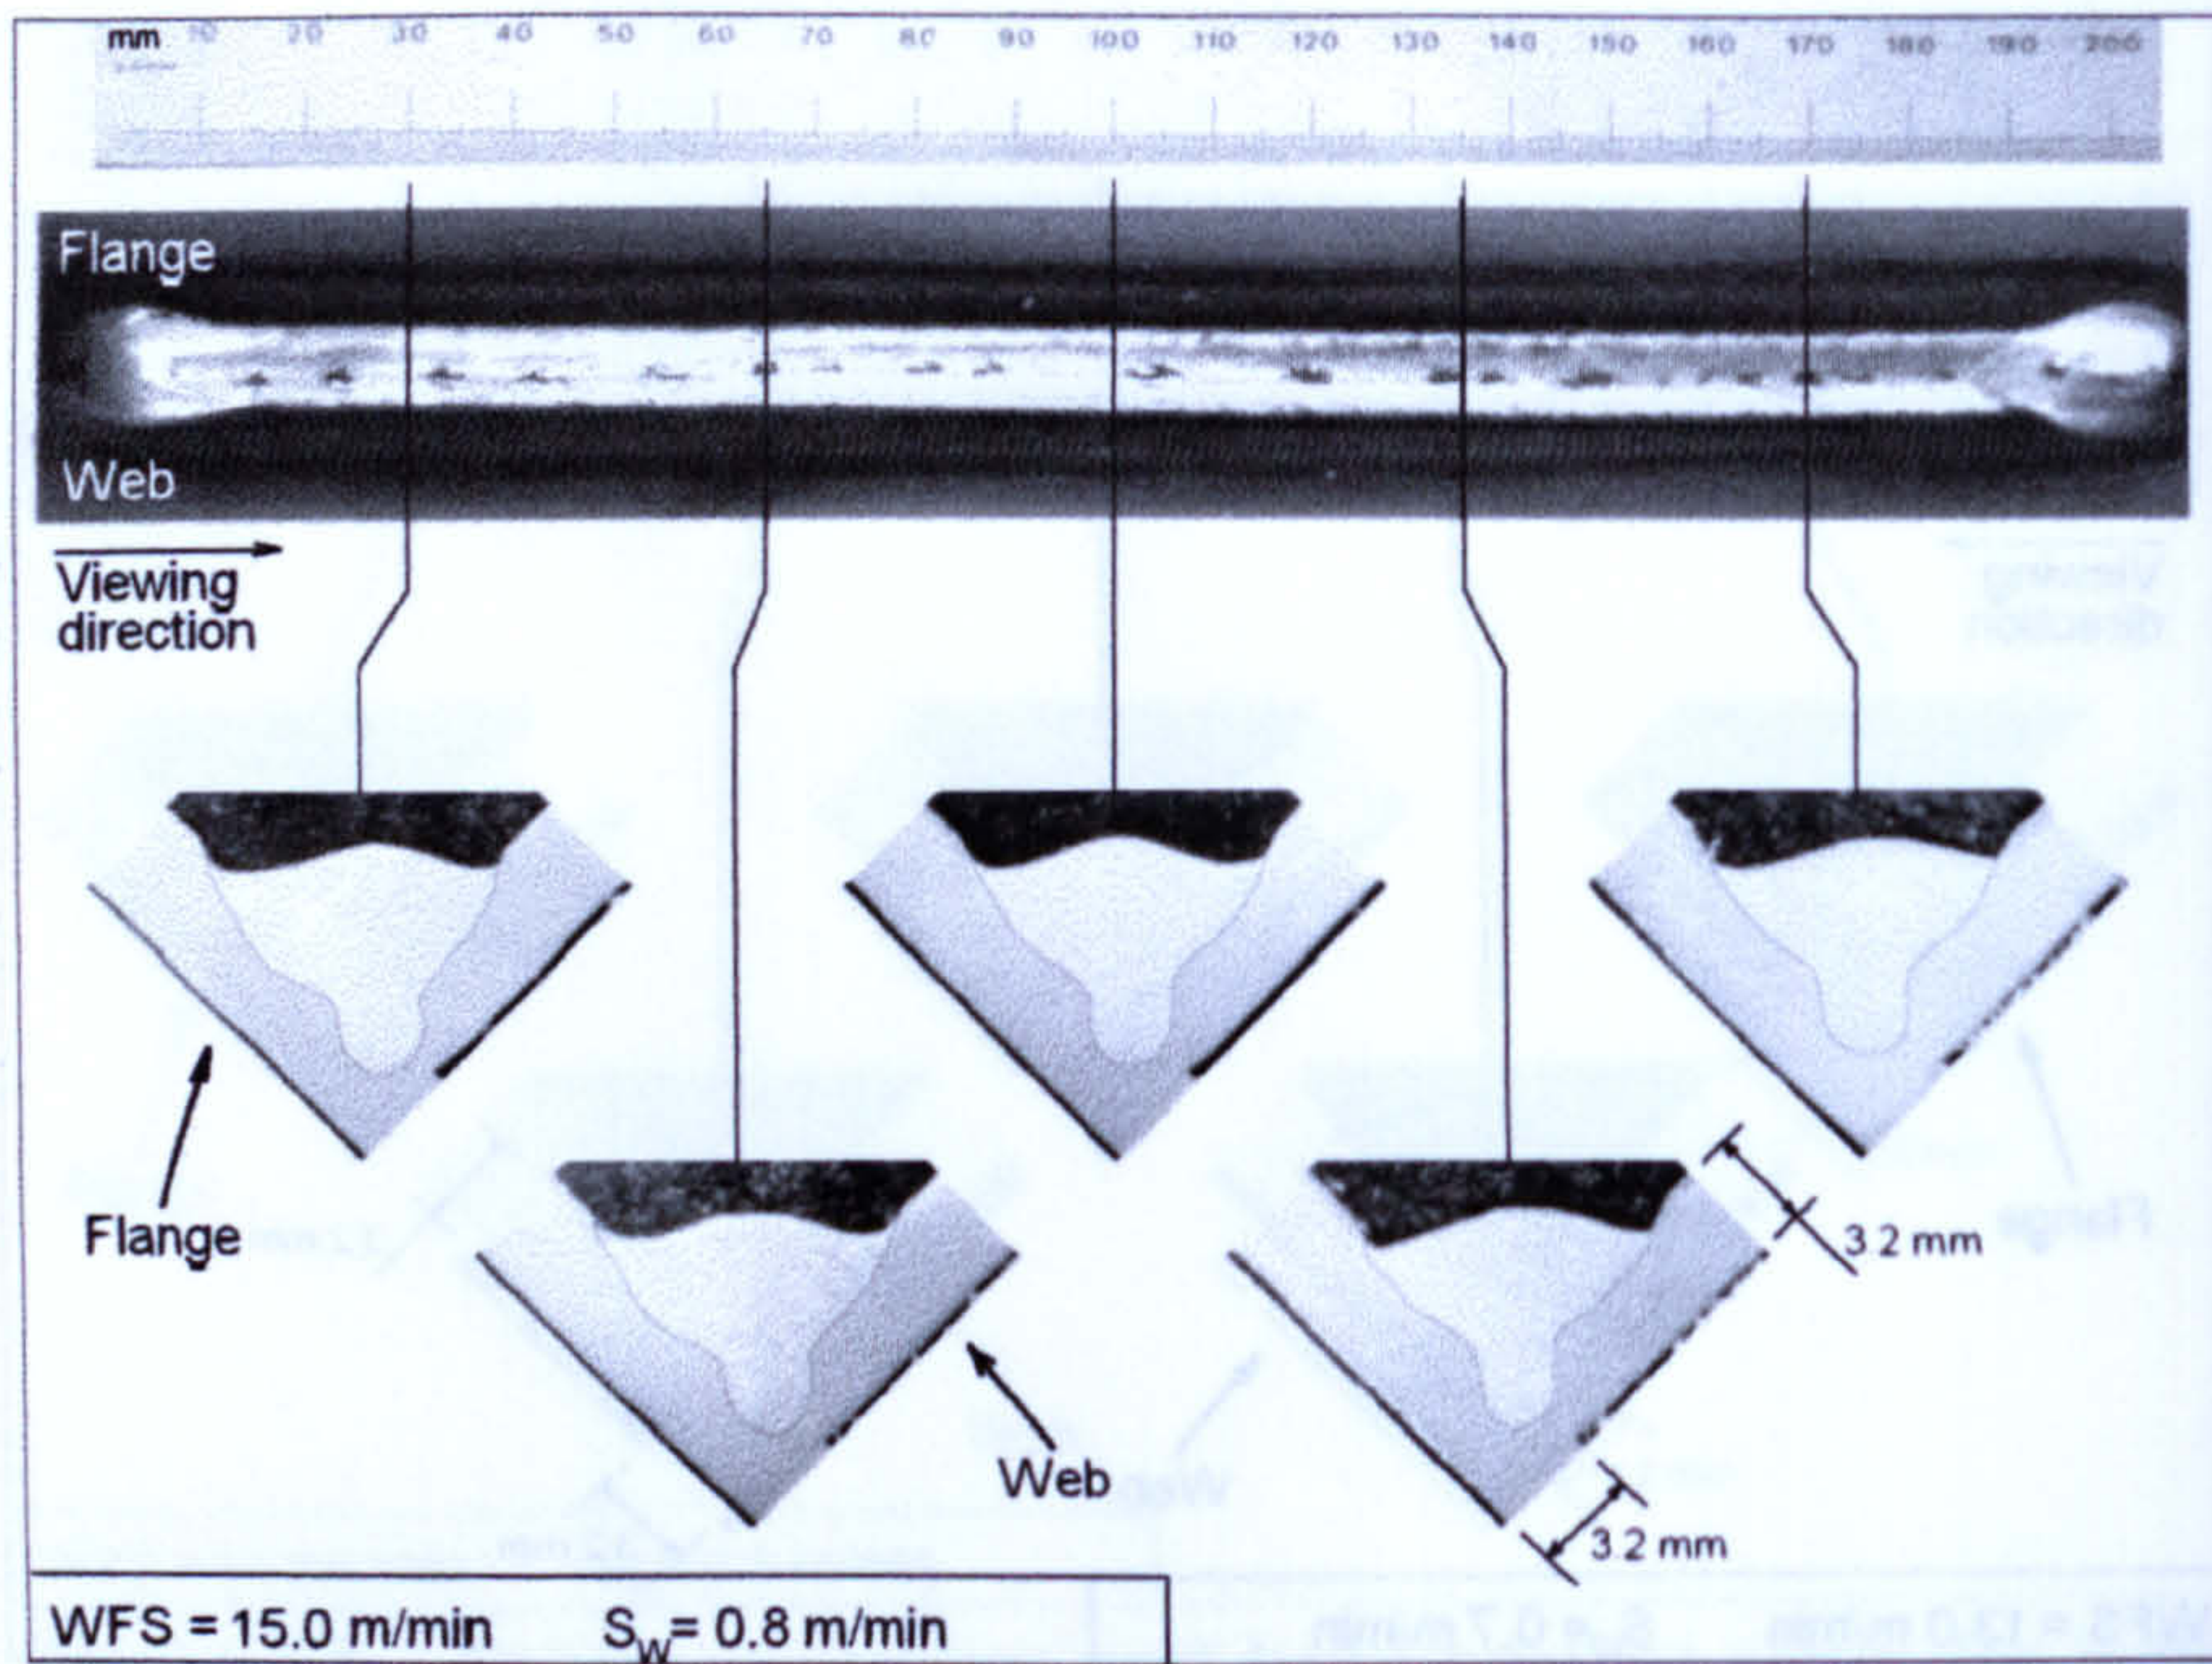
Bead appearance and bead profiles along the weld for the non-controlled fillet welding trial "M5".
